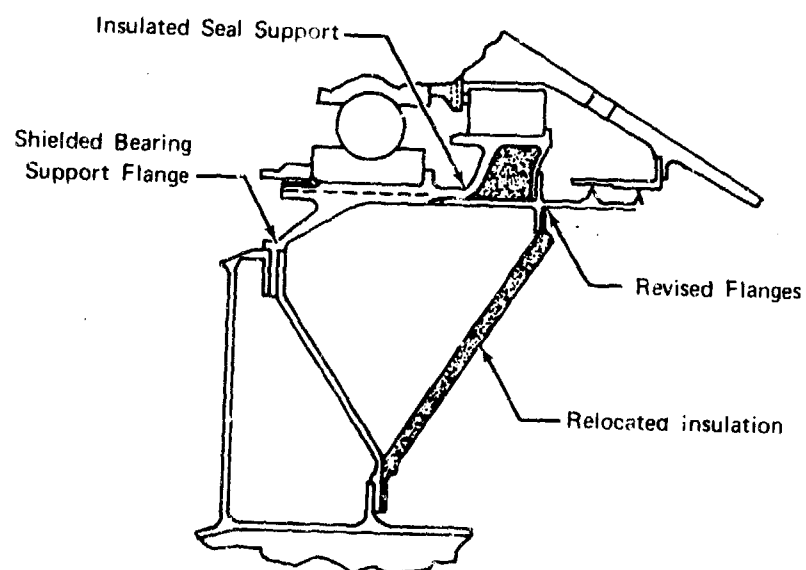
Revisions of STJ346A Front Bearing and Seal Supports
